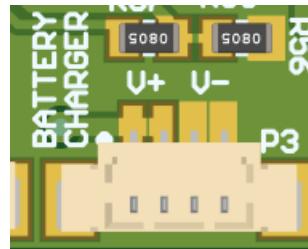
External batteries charger PicoBlade connector on the PCB.
